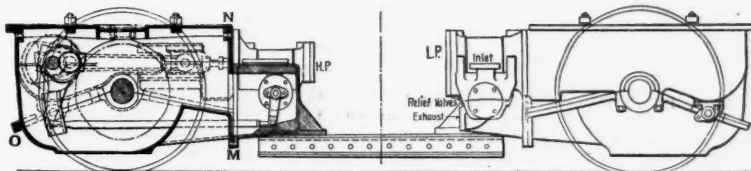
Section and Elevation of Oil Chests, Hoadley-Knight Air Car.
